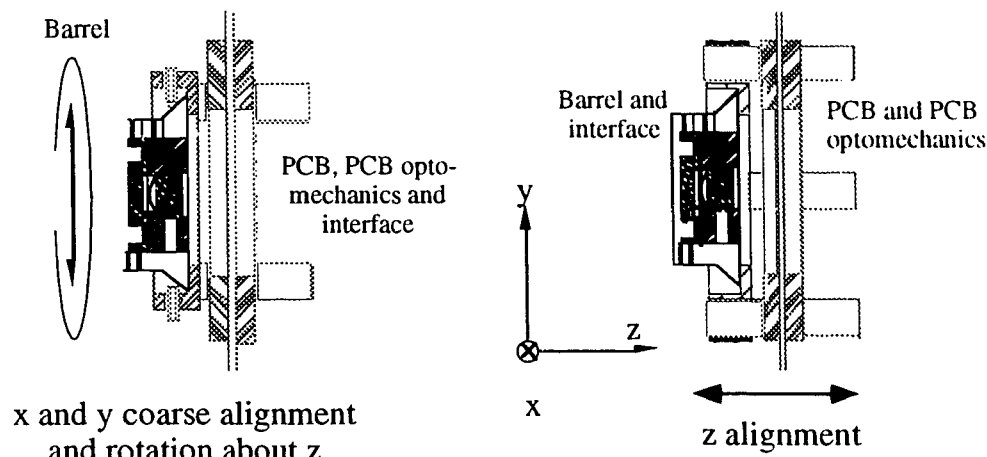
Degrees of freedom adjusted through PCB optomechanics and barrel to PCB interface.
